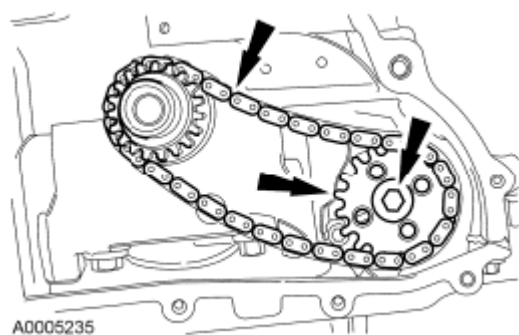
Locating Oil Pump Drive Chain, Sprocket & Bolt
